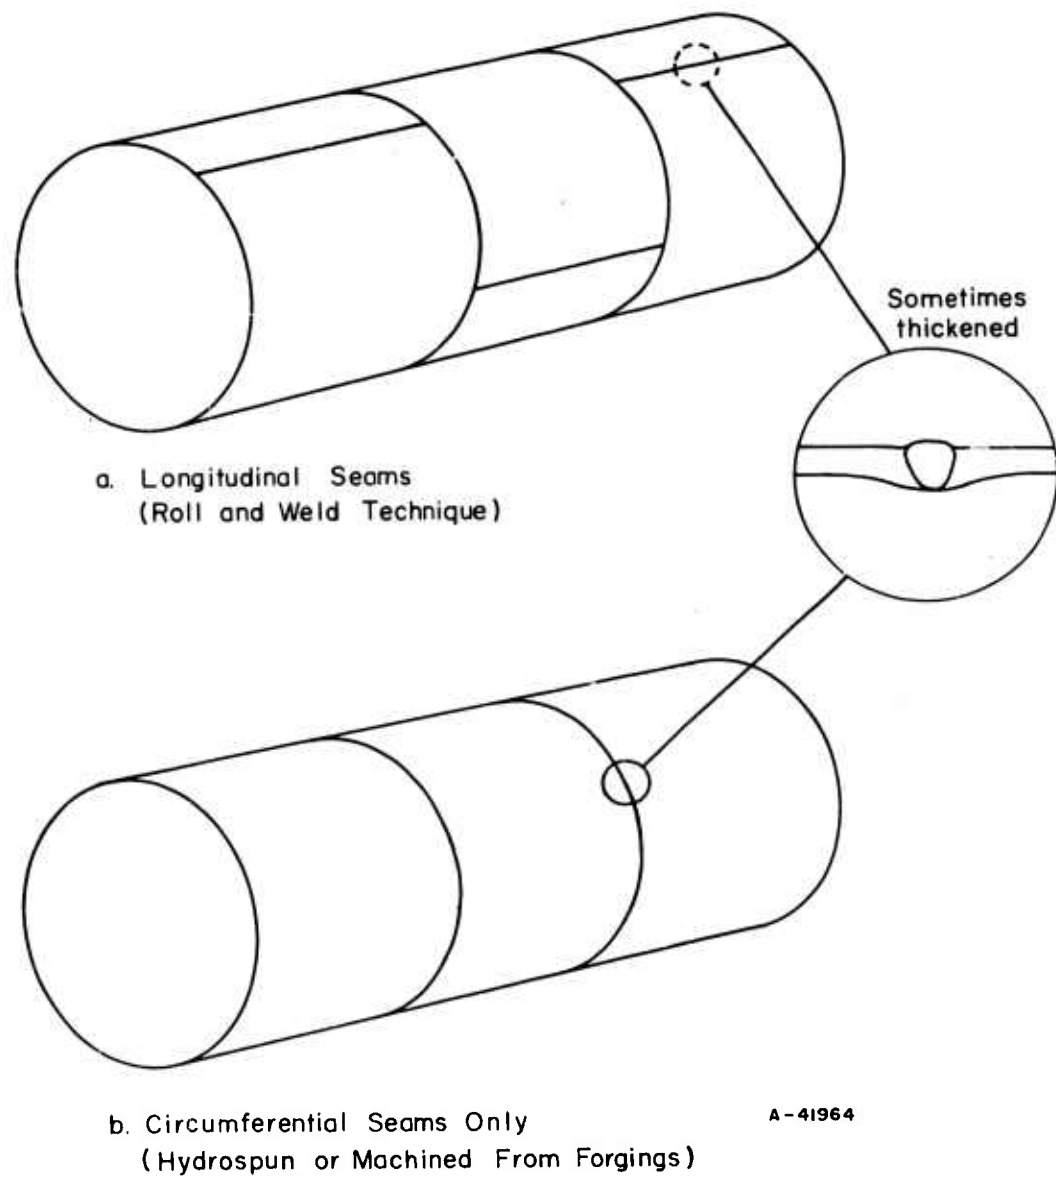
PRODUCTION MOTOR-CASE WELDING CONFIGURATIONS
